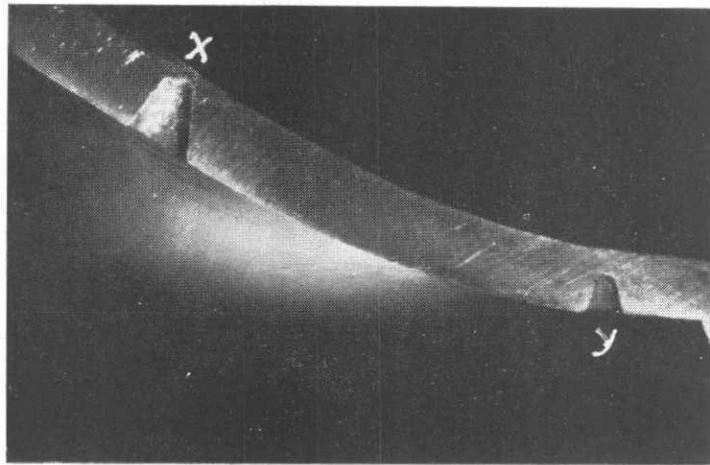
Macro photograph of a section through the bearing bush showing oil holes closed.
